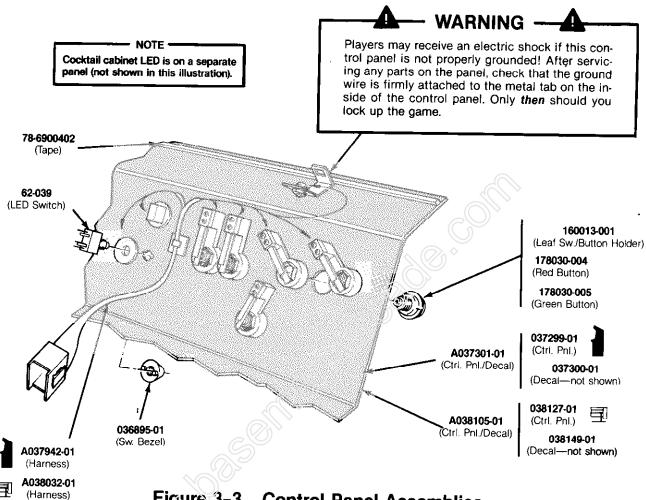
Control Panel Assemblies Upright A037302-01 A and Cocktail A038104-xx A
